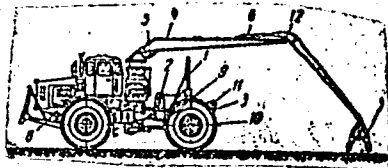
1 - pick-up assembly; 2 - hoist; 3 - saddle-hitch device; 4 - movable boom; 5 and 6 - power cylinders; 7 - pincer clamp; 8 - mono-axle tractor; 9 - semitrailer; 10 - steering axle of semitrailer; 11 - protective pipe; 12 - pulley.
